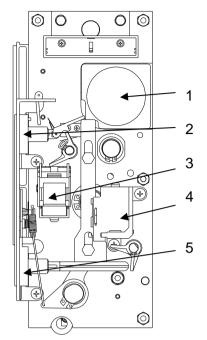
Universal Mechanism Assembly (UMA) Right Side View
